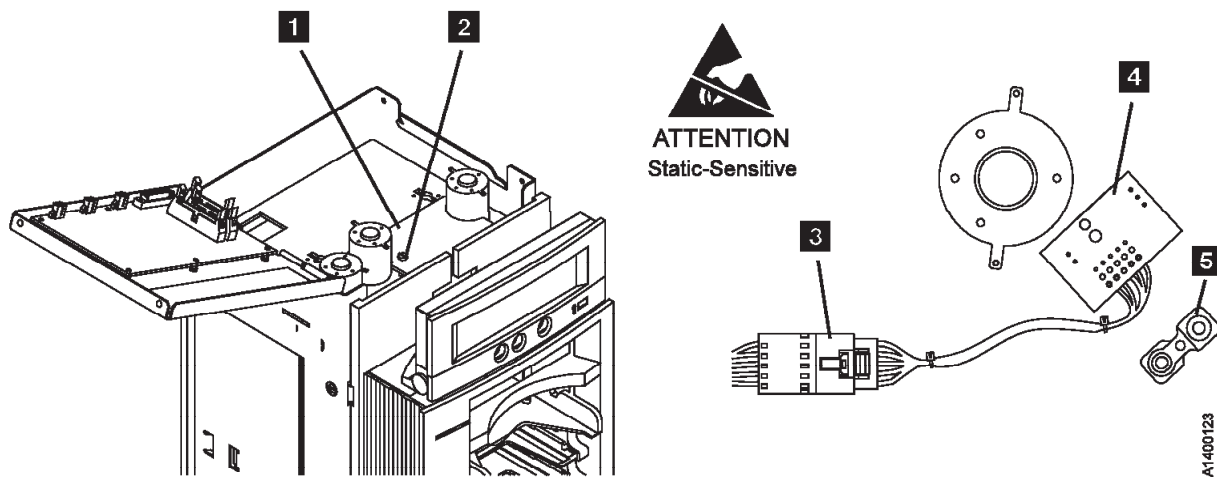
Global/Interference Sensor Assembly (Upper)
